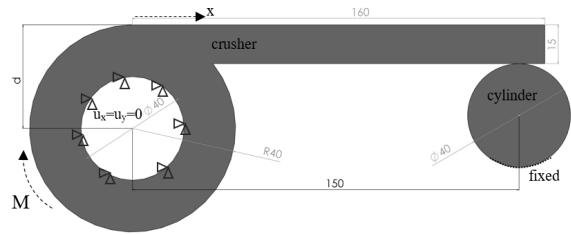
Geometrical model of crusher and cylinder and dimensions (in mm).
